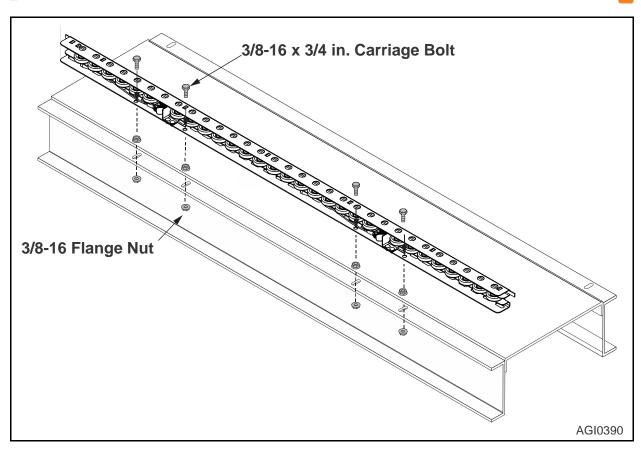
78 Direct-Mounting Skate Wheel Side Guides
